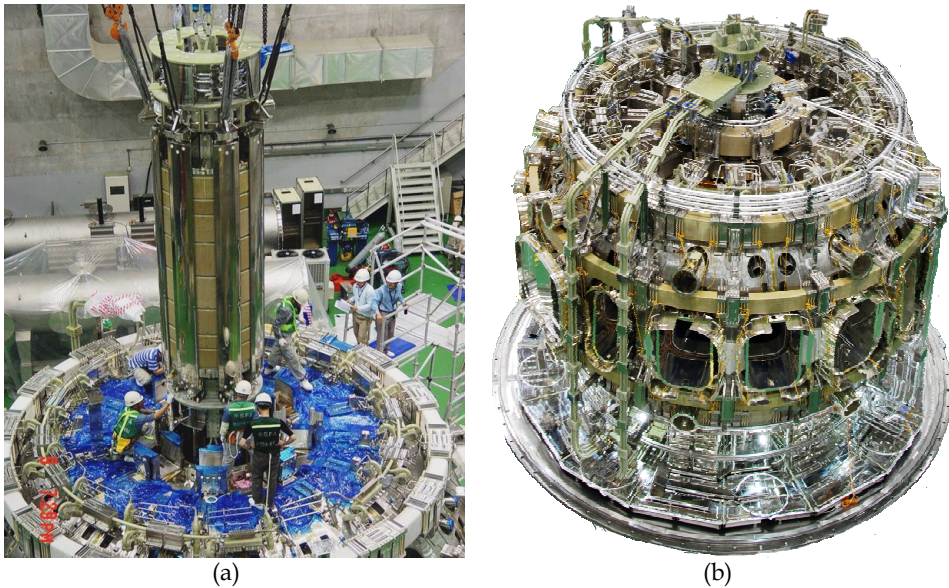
Pictures of the KSTAR magnet system. The installation of the CS coil assembly into the center of the KSTAR device (a) and the completion of magnet assembly (b).
